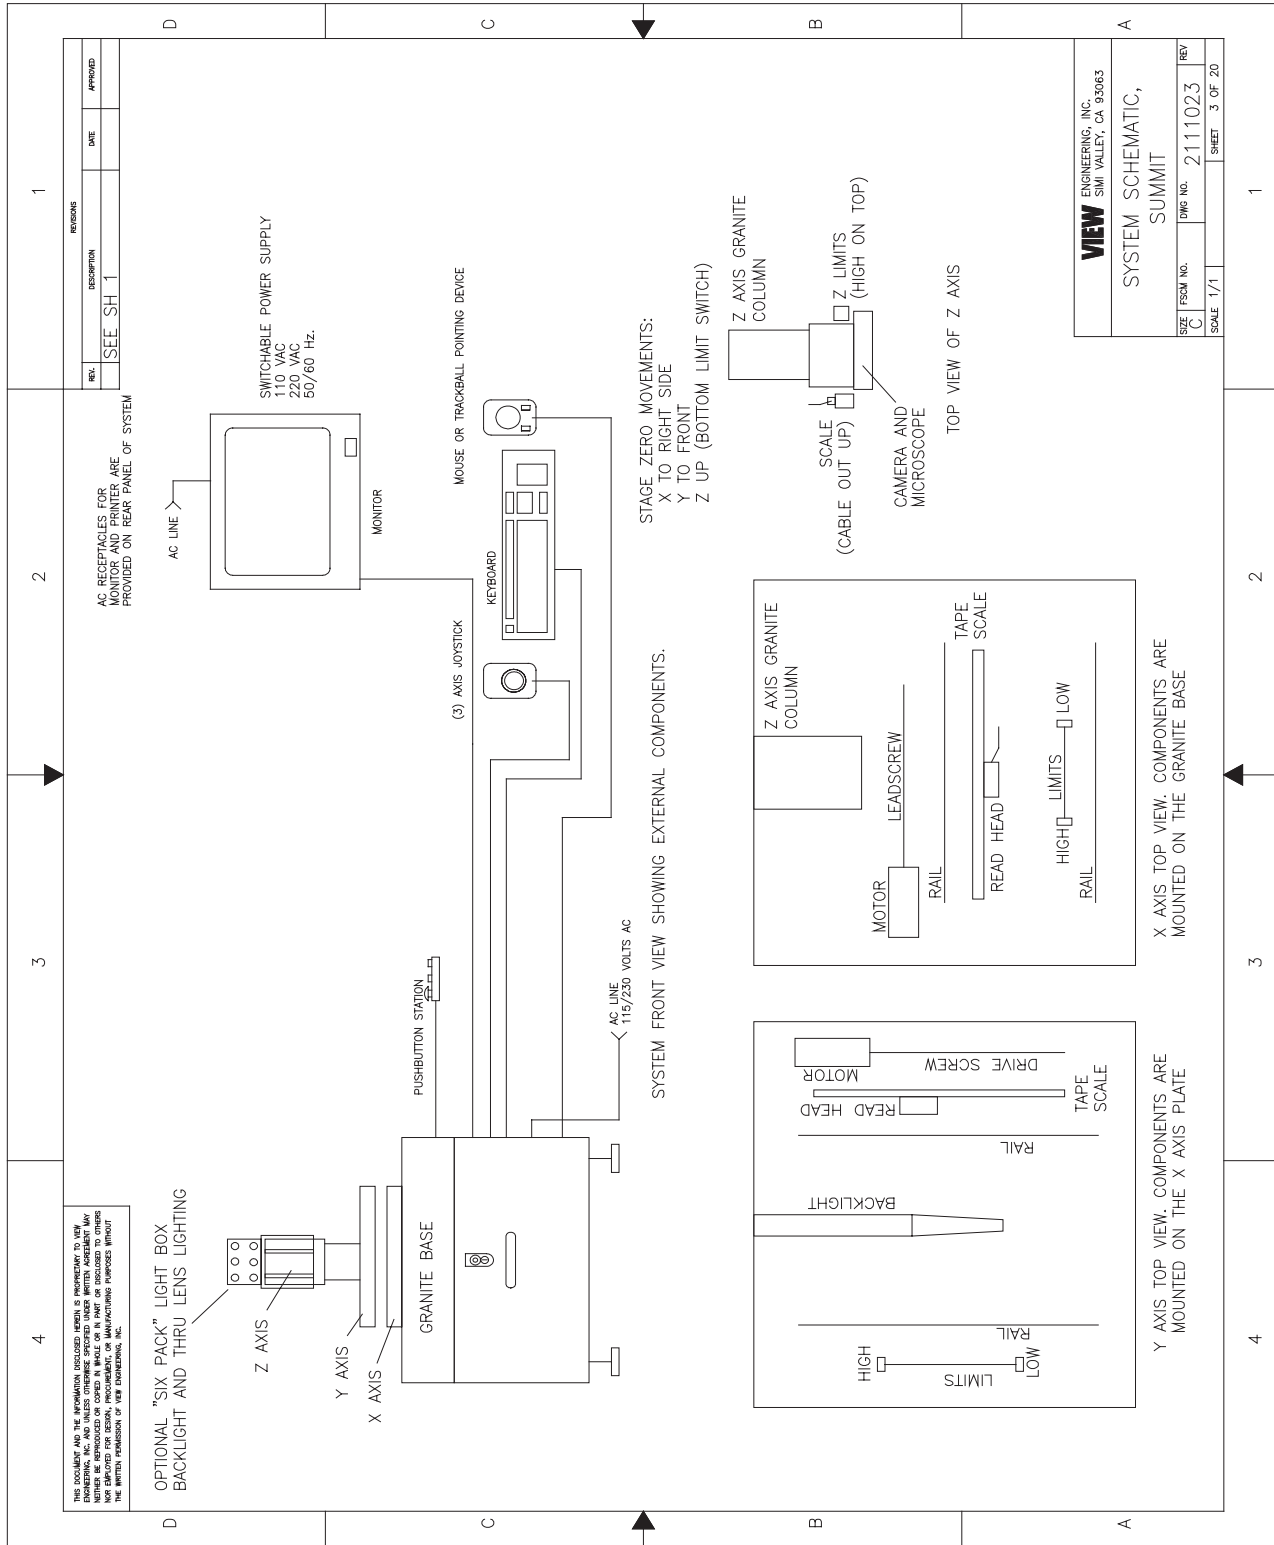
SYSTEM & STAGE PLAN VIEW MODEL 1212 (Sheet 3)
